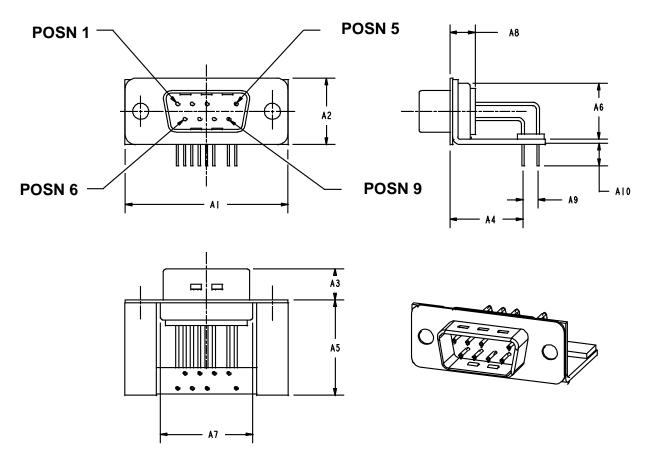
Free board right angle thru hole (version 2) overview and outline dimensions
